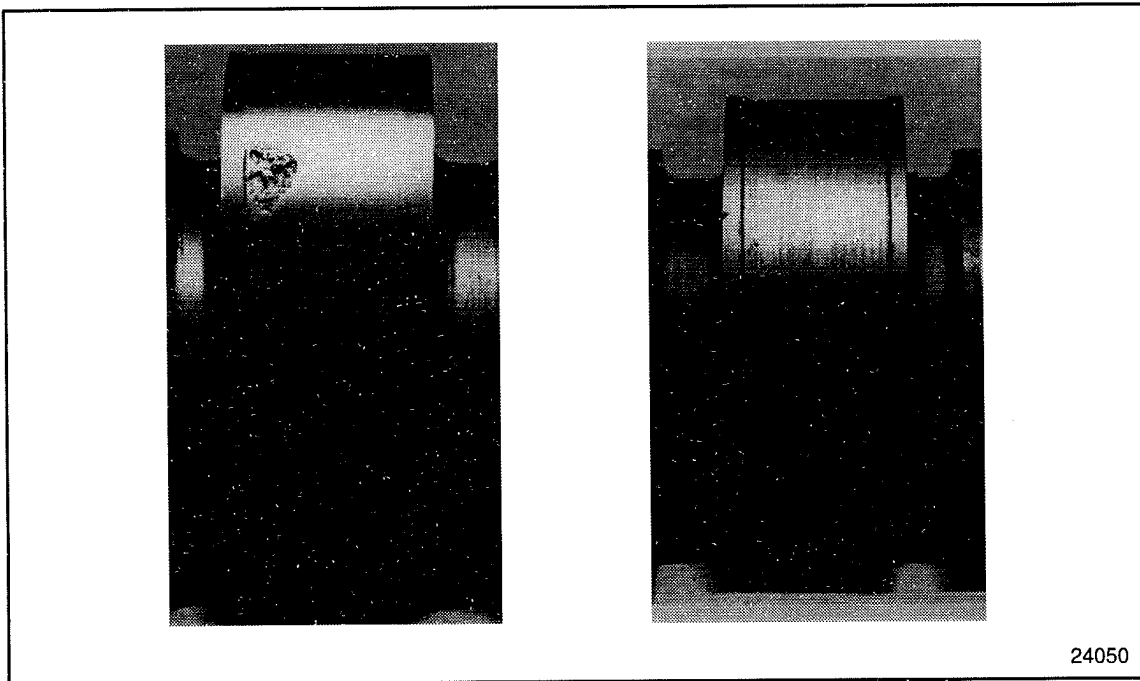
Camshafts Not Acceptable for Reuse
